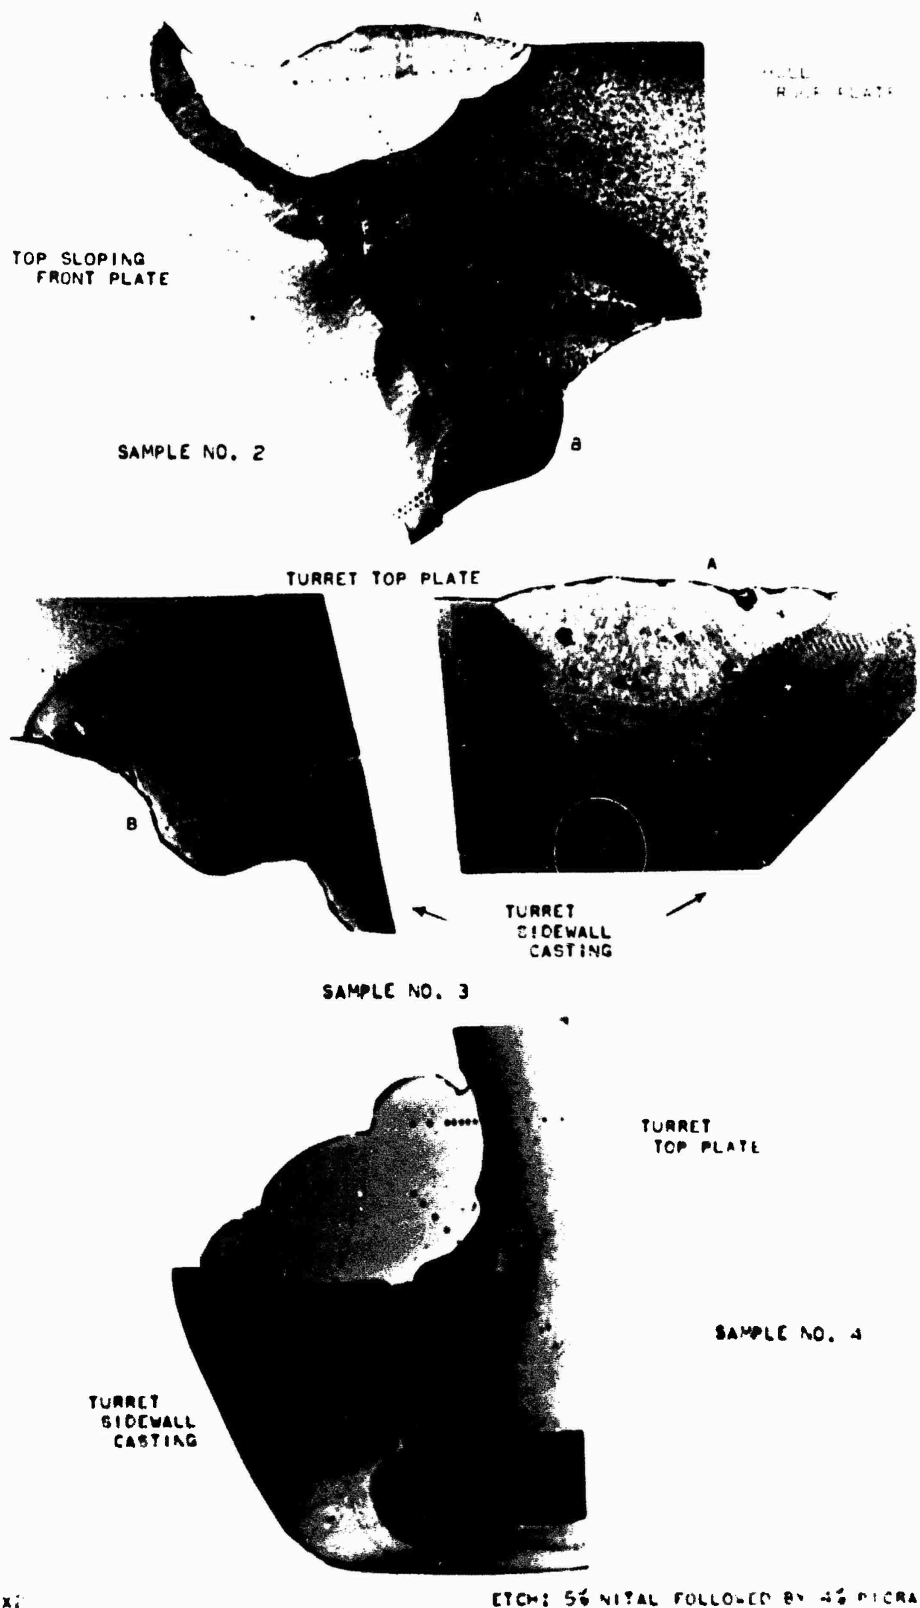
MACROETCHED SECTIONS THROUGH WELD DEPOSITS OF SAMPLES NO. 2 AND 3, RUSSIAN MEDIUM TANK T-34, AND SAMPLE NO. 4, RUSSIAN HEAVY TANK KV-1. SEE FIGURE 2 FOR LOCATION OF WELD DEPOSITS IN JOINTS.
